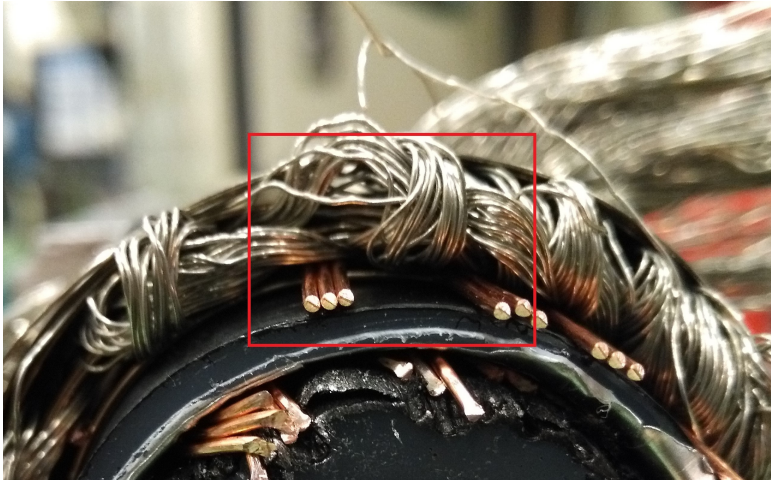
Picture showing the cross section of a correctly installed ground screen connection of type I. The cross section is taken from what would be the cable side of the joint in an installation. It can be seen that the copper wires and the joint ground screen is in direct contact (red box).
